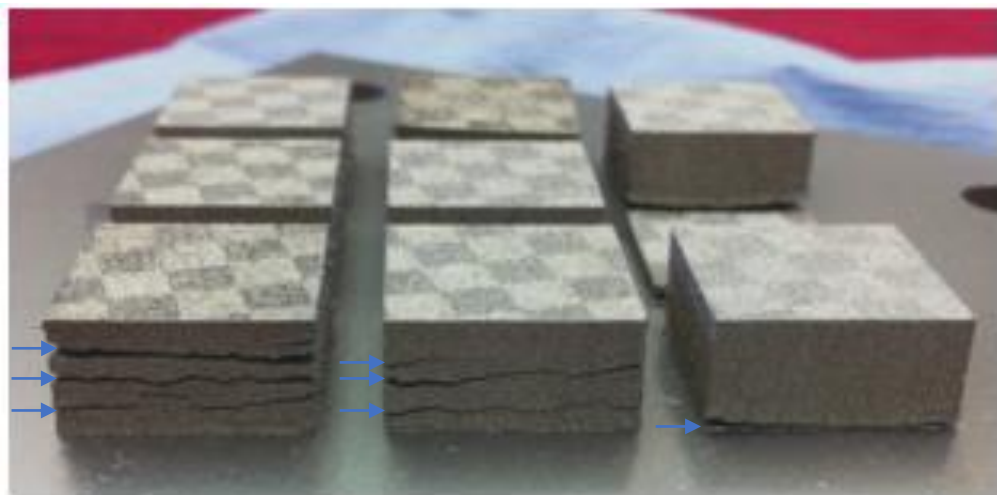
Macro-cracking (or delamination) between layers within component and between component and build plate [72]. Cracking indicated with arrows.
